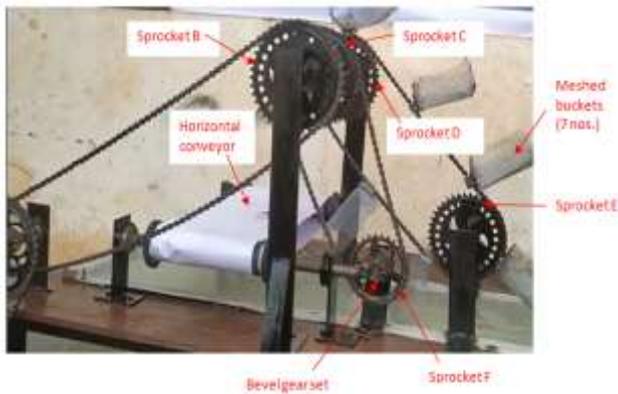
Drive from sprocket A to the conveyors through chain drives and bevel gear drive.
